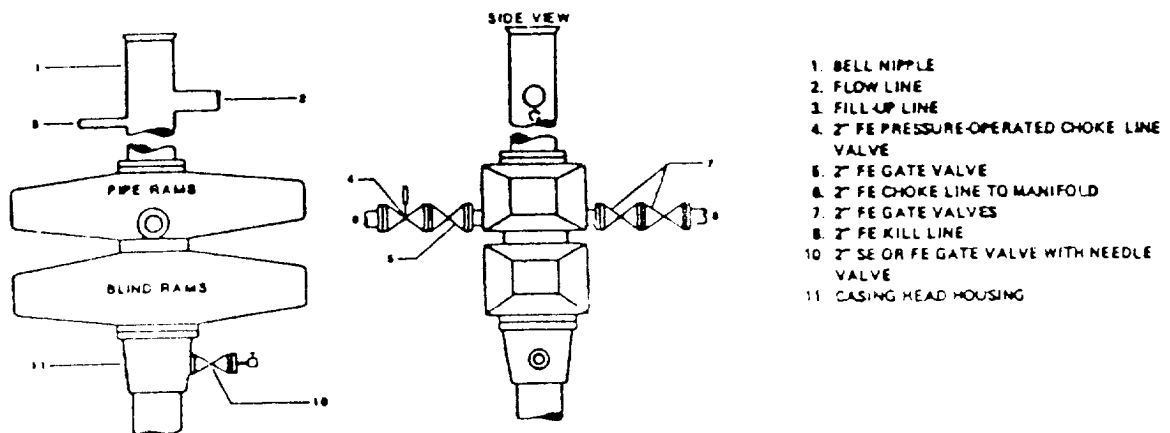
Standard Hydraulic Blowout Preventer Assembly (2 M or 3 M Working Pressure) Alternative 3 (without Drilling Spool)
